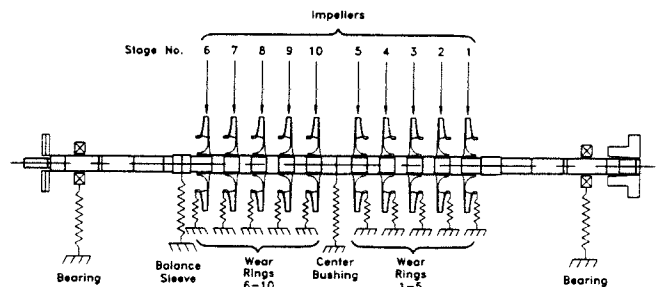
Pump Rotor Model Showing Locations of All Effective Bearings.
